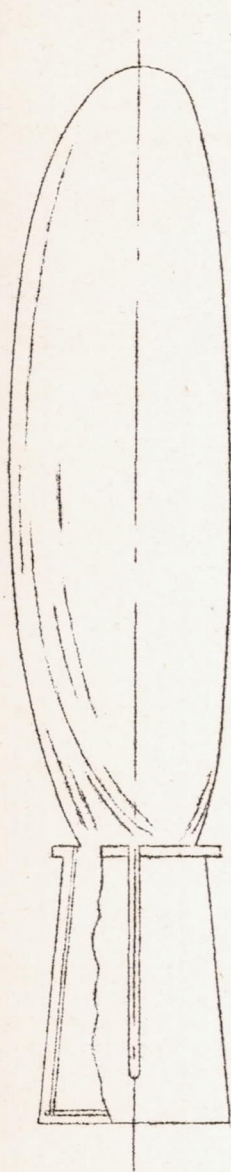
Split steel sleeve compressed about butt end of propeller blade.
